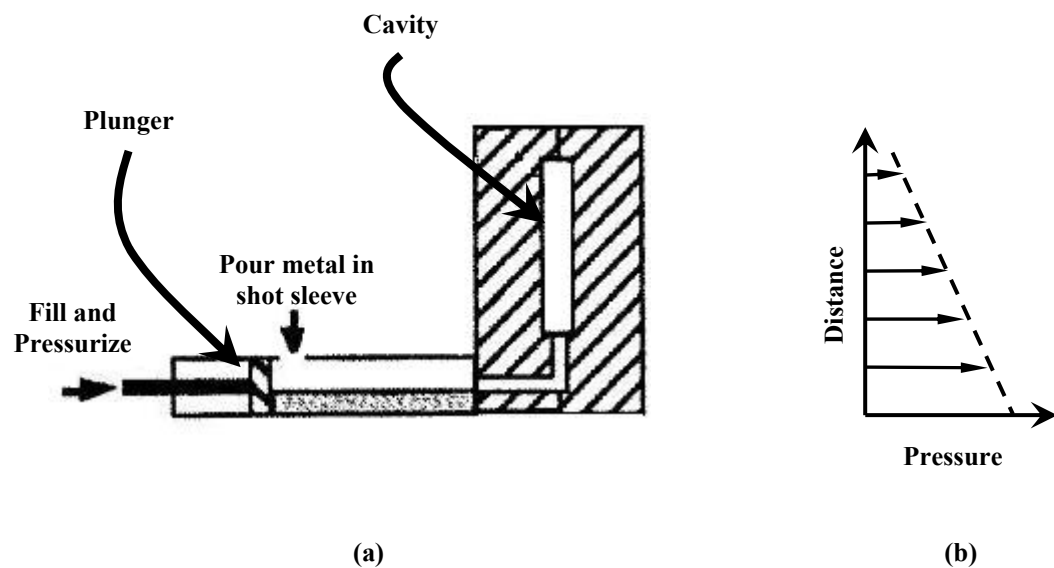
Indirect squeeze casting; (a) Metal poured into shot sleeve; (b) resulting non-uniform pressure profile in the die cavity [23]
